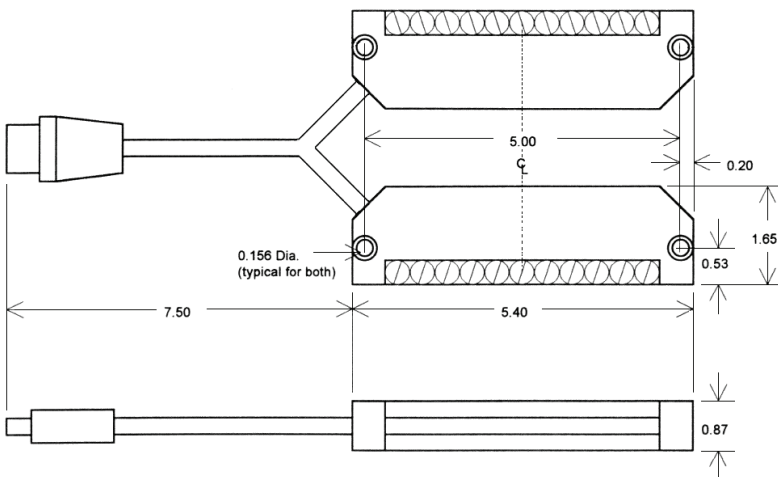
Dimensioned drawing of the Distribution Cable Terminal Block 22C (dimensions shown in inches).
